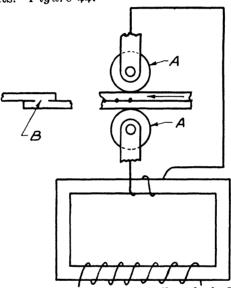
Seam welding circuit: A. Copper alloy wheels, B. The weld proper
